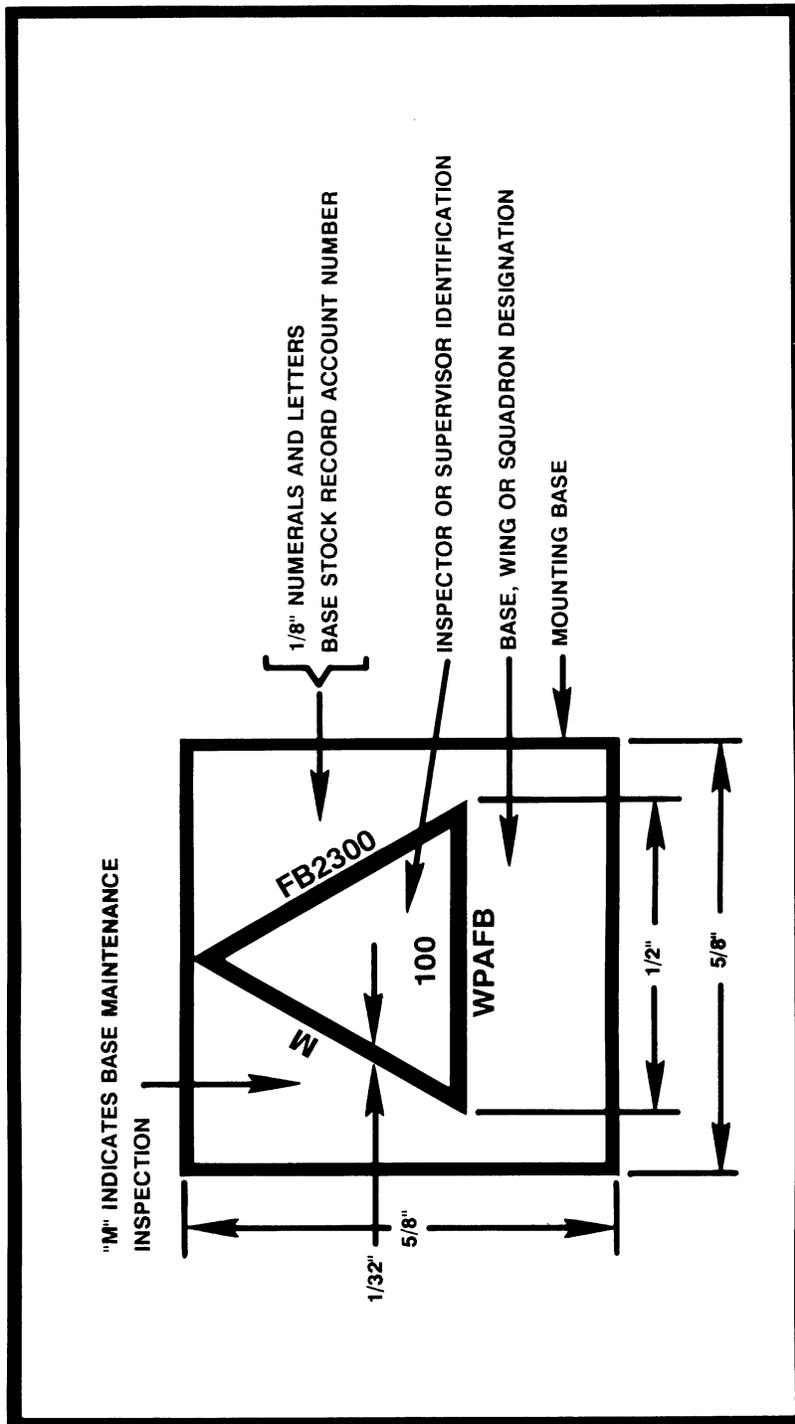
Sample Enlarged Illustration of Base Level Inspection Stamp
